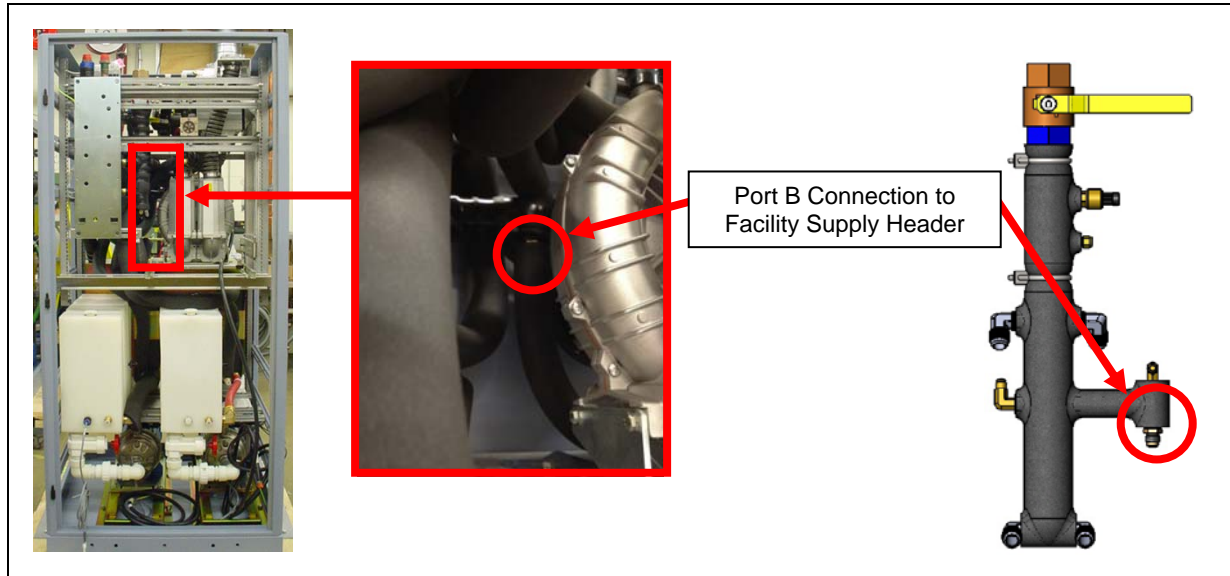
Front View Location of Port B Connection to Facility Supply Header
